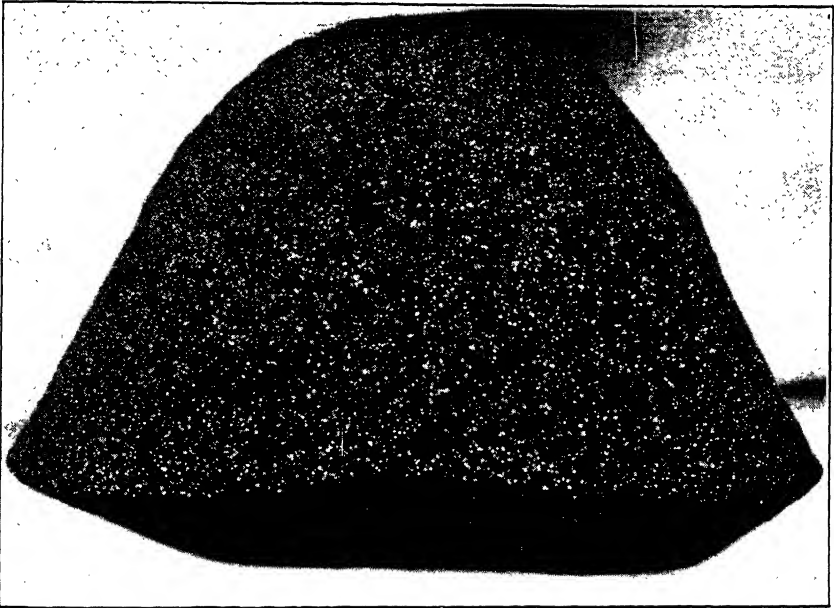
UNTOUCHED PHOTOGRAPH OF TYPICAL PIG FRACTURE IN 1936, AFTER IMPROVEMENTS HAD BEEN PERFECTED.
